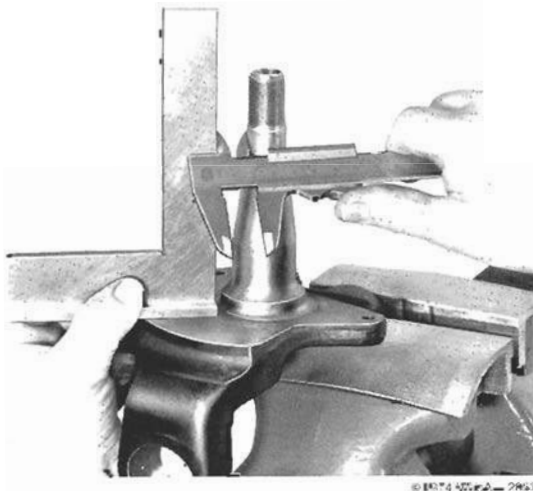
A vernier caliper and machinist's square being used to check the stub axle for bending.
